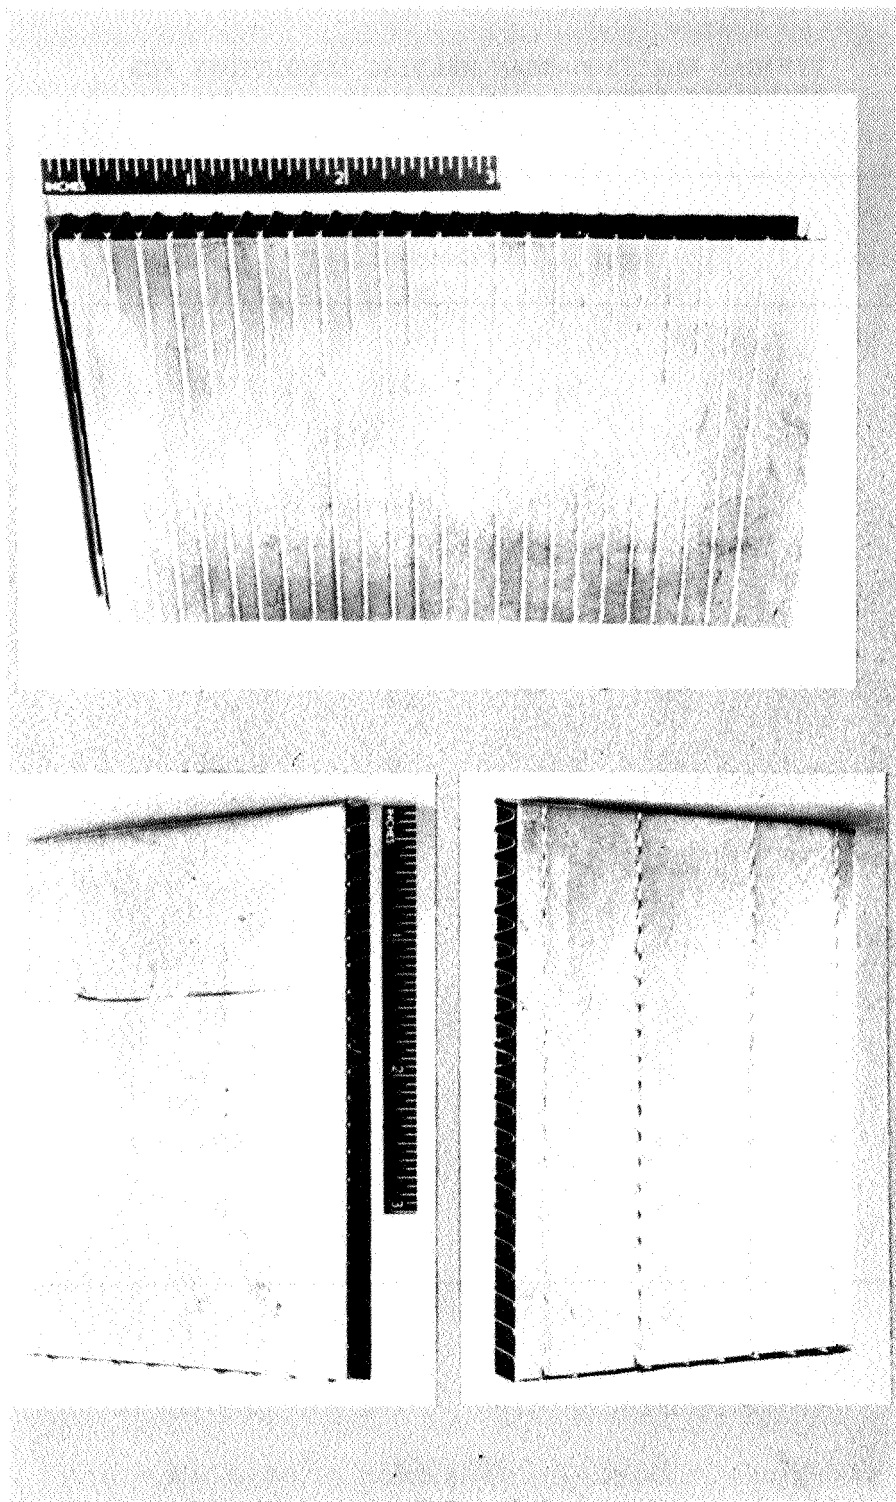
STAINLESS STEEL HONEYCOMB PANEL FABRICATED BY ELECTRON-BEAM WELDING
